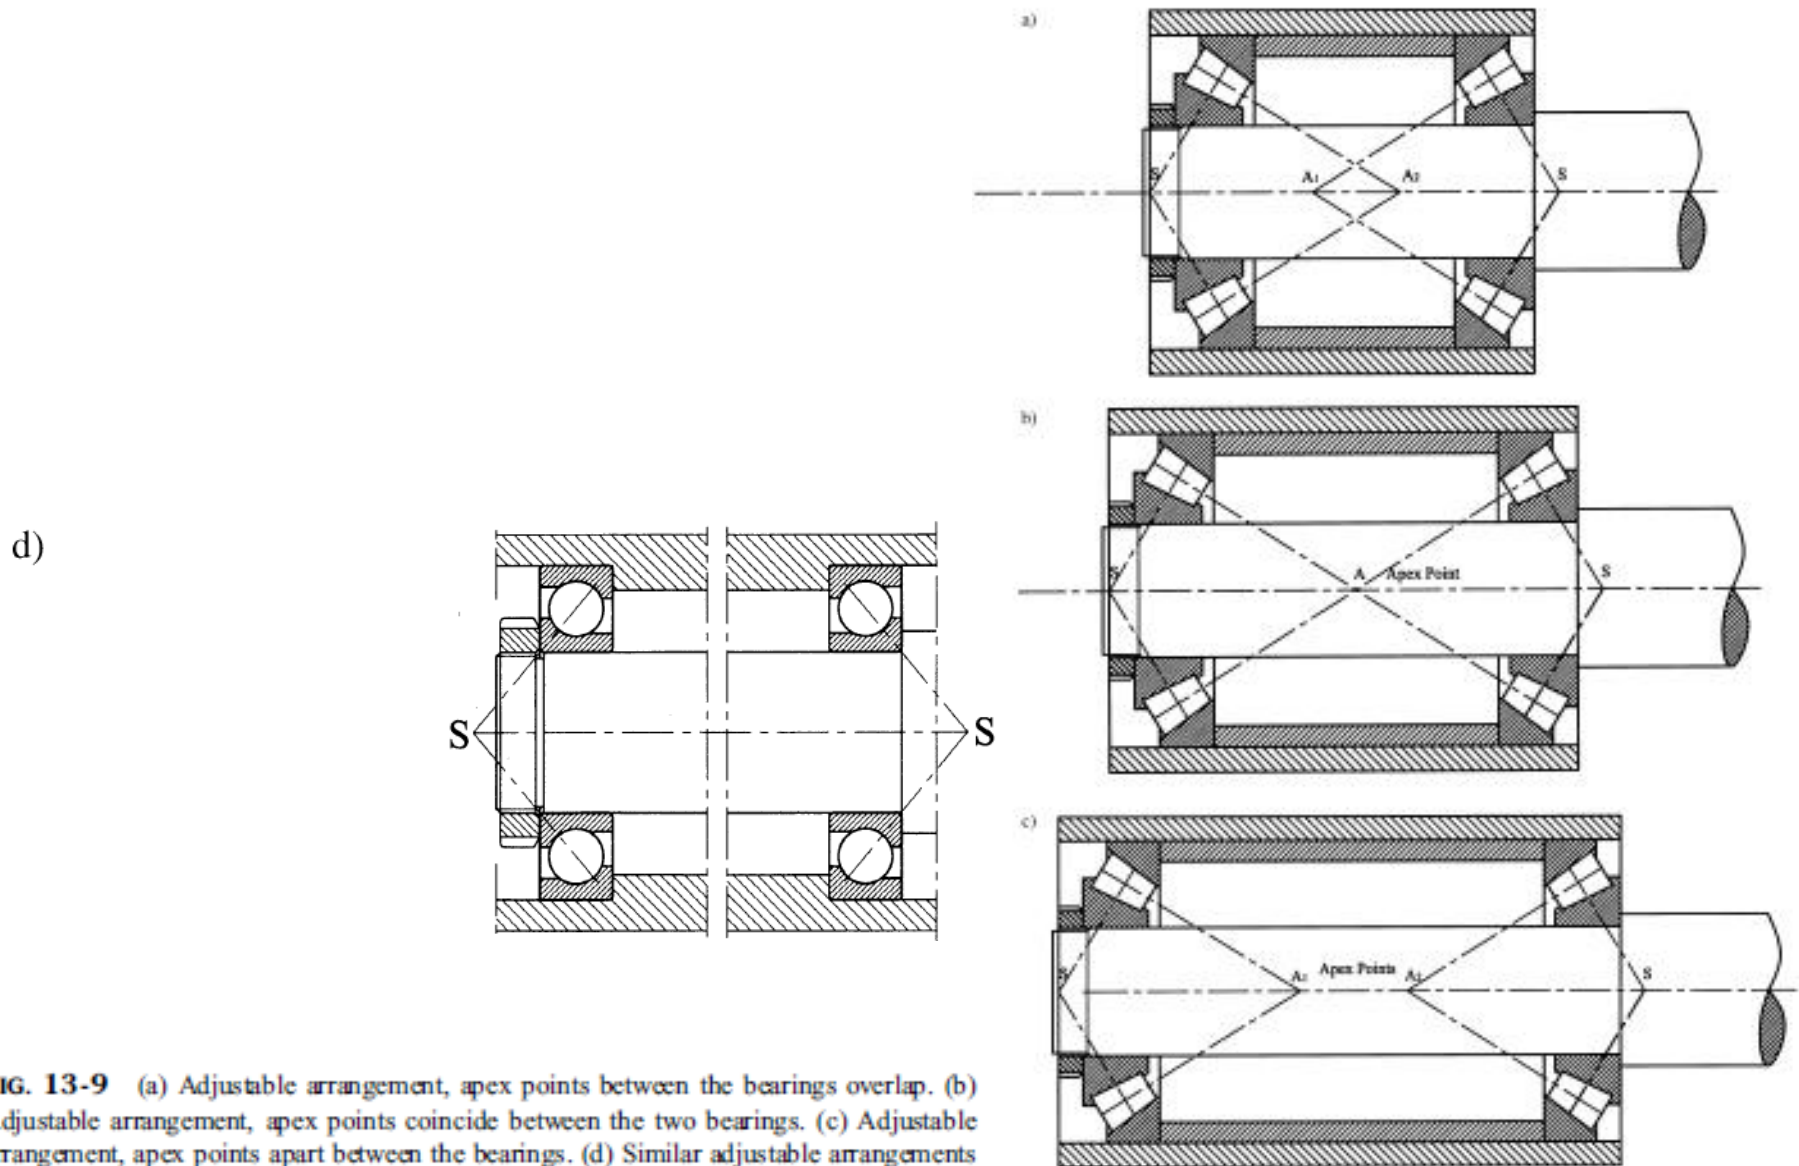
(a) Adjustable arrangement, apex points between the bearings overlap. (b) Adjustable arrangement, apex points coincide between the two bearings. (c) Adjustable arrangement, apex points apart between the bearings. (d) Similar adjustable arrangements for angular contact bearings.
